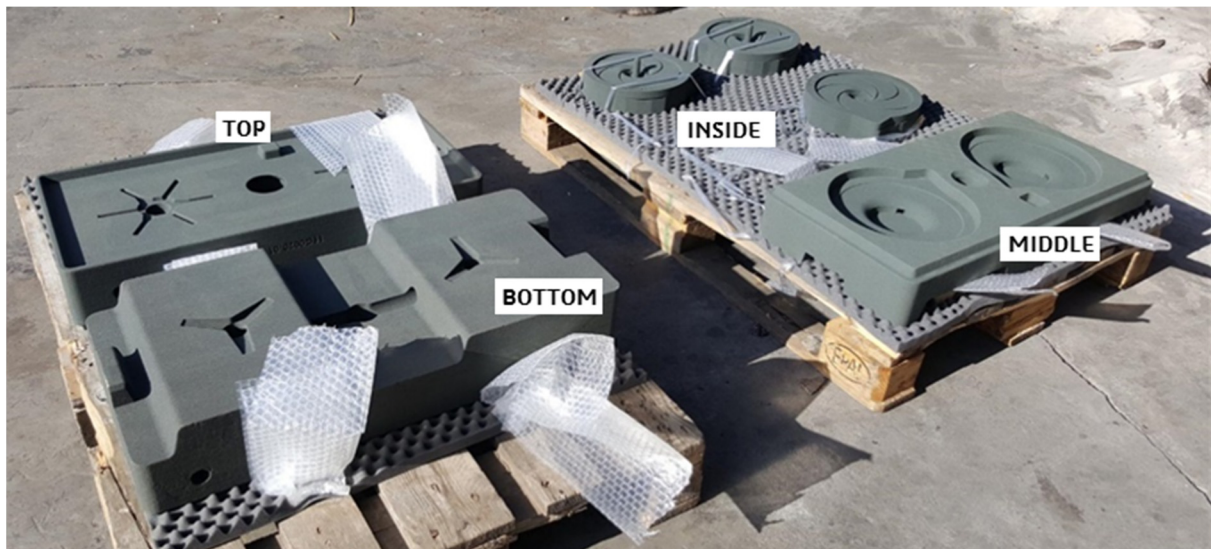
Photographs of the manufactured 3D sand moulds indicating the different parts.
